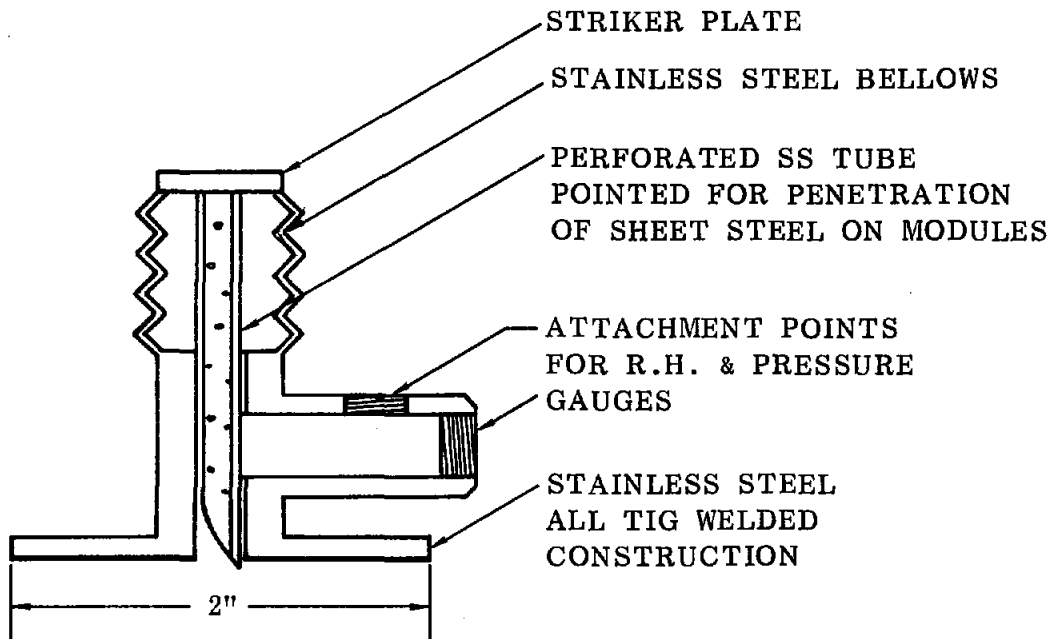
Cross-sectional View of Fixture for Attaching R.H. and Pressure Gauges on Mirror Modules
